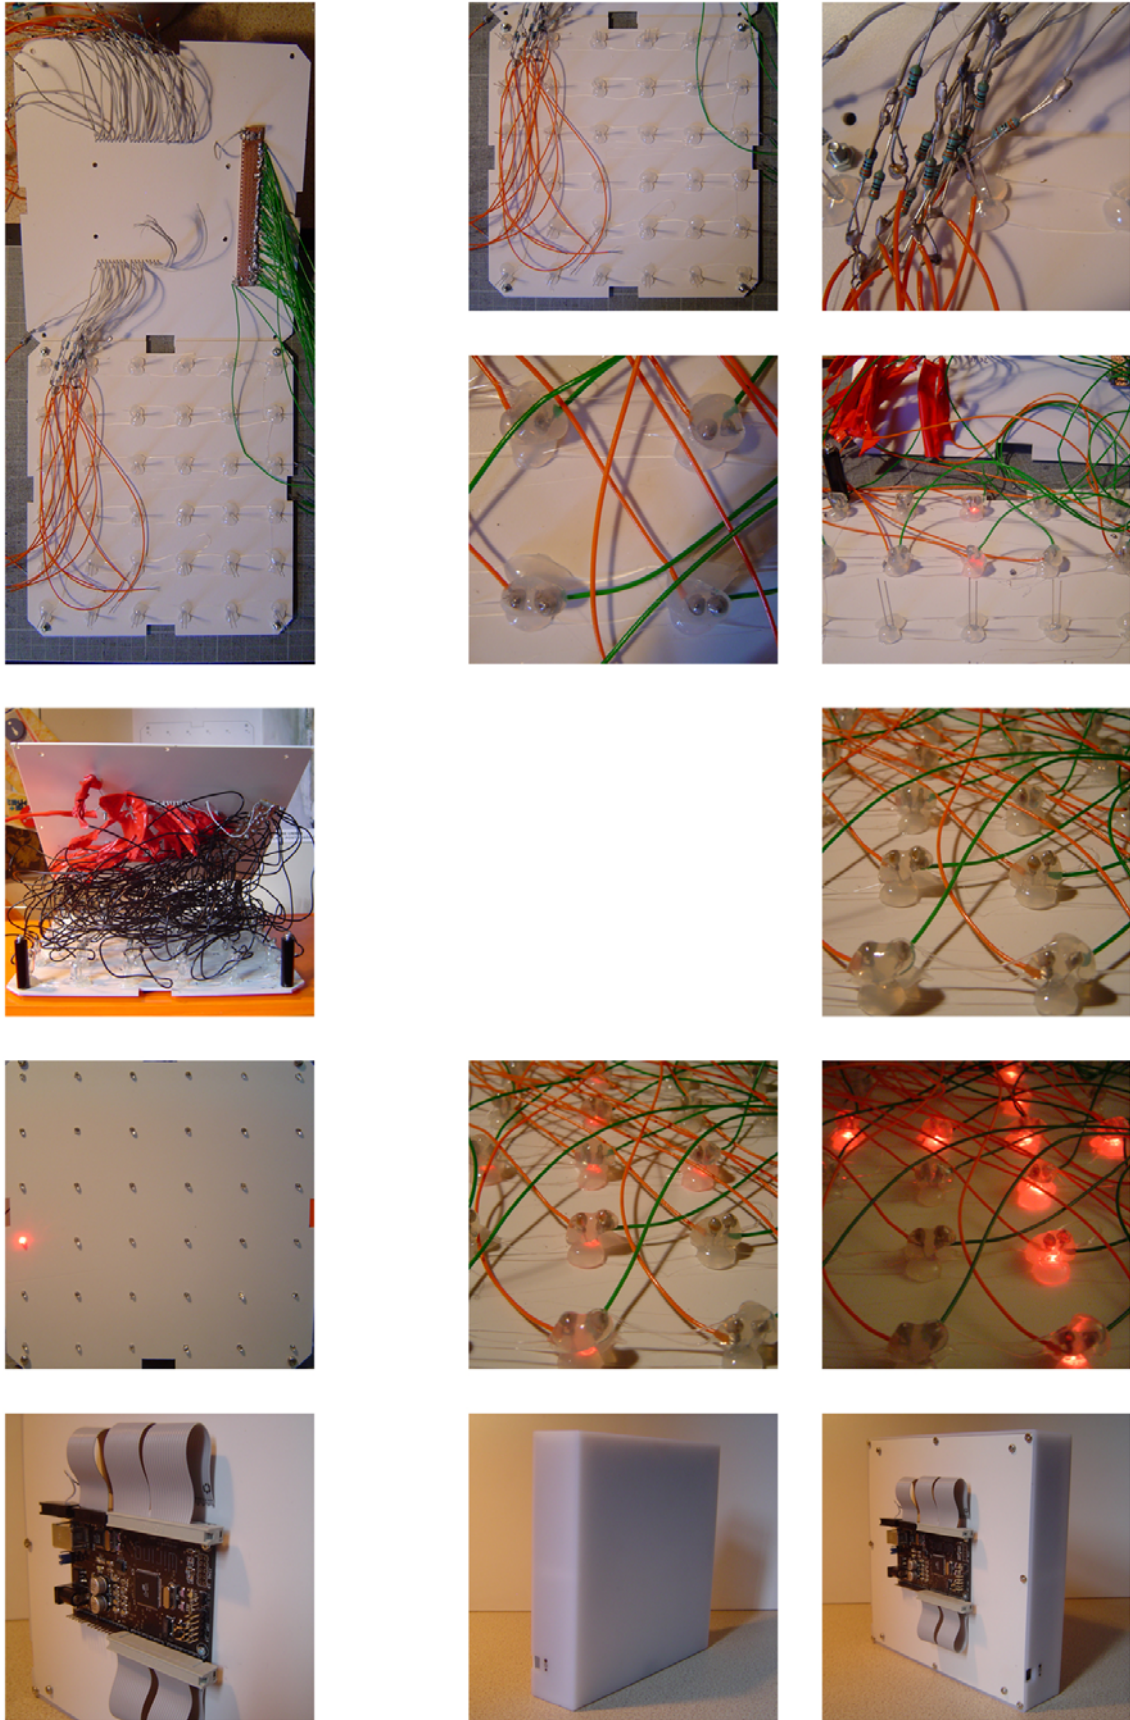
Building the prototype, at the bottom we can see the prototype with the Wiring I/O Board attached at its back.
